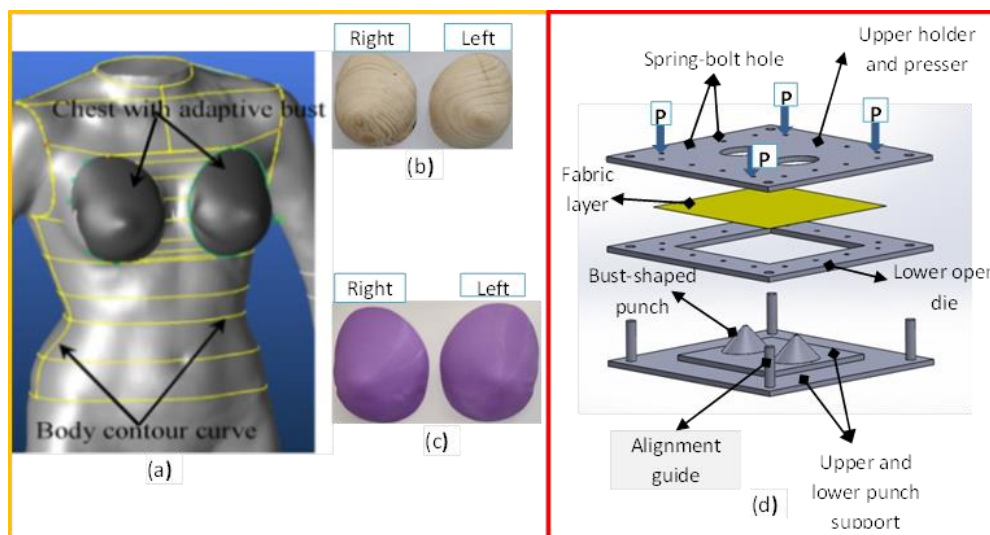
90B bust size cup moulding and the punching bench (a) women body with adaptive bust (90B) (b) single-curved (solid) (c) double-curved (surface) paired bust-shaped punch, and (d) schematic view of adapted forming bench set up
